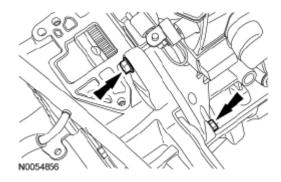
Locating Engine-To-Transaxle Bolts Courtesy of FORD MOTOR CO.
